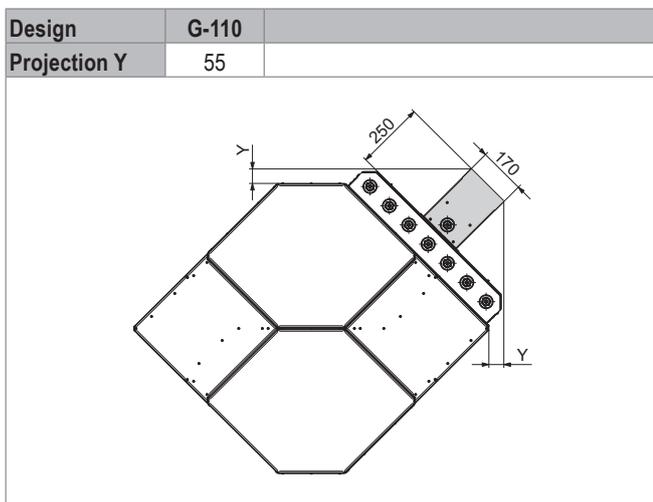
Diagram showing dimensions of Gotthard combi block (in mm)
